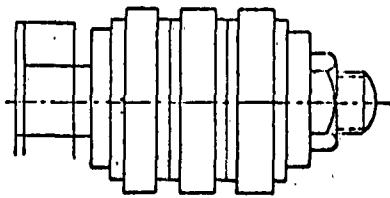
Mandrel for grinding rotor packs on outside diameters.
